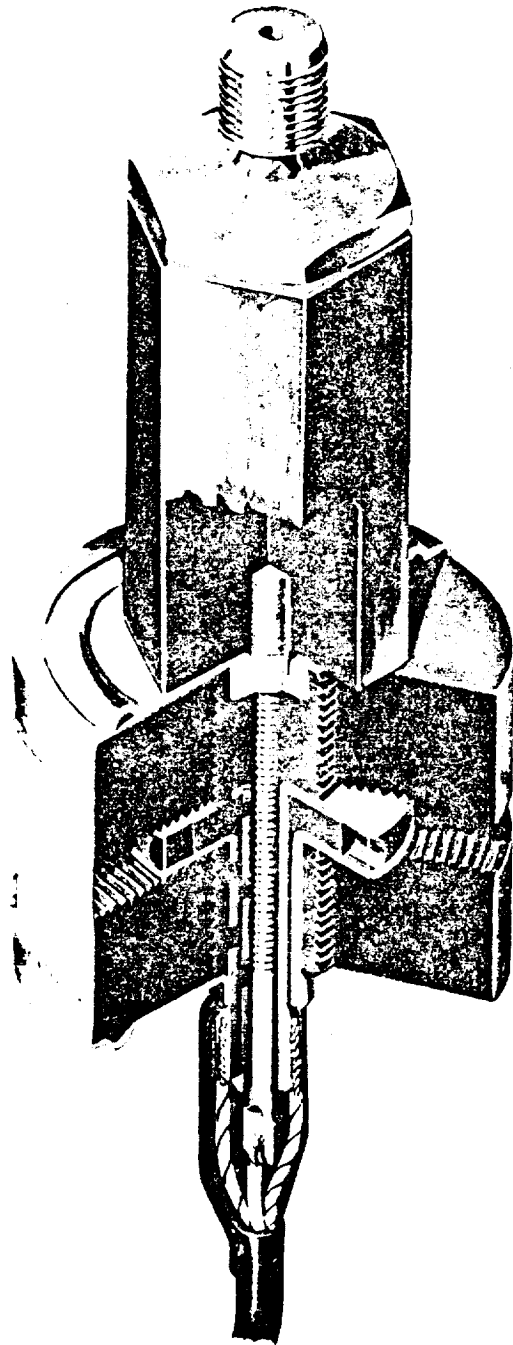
Radially outward firing pyrotechnic igniter for center of injector mounting.
